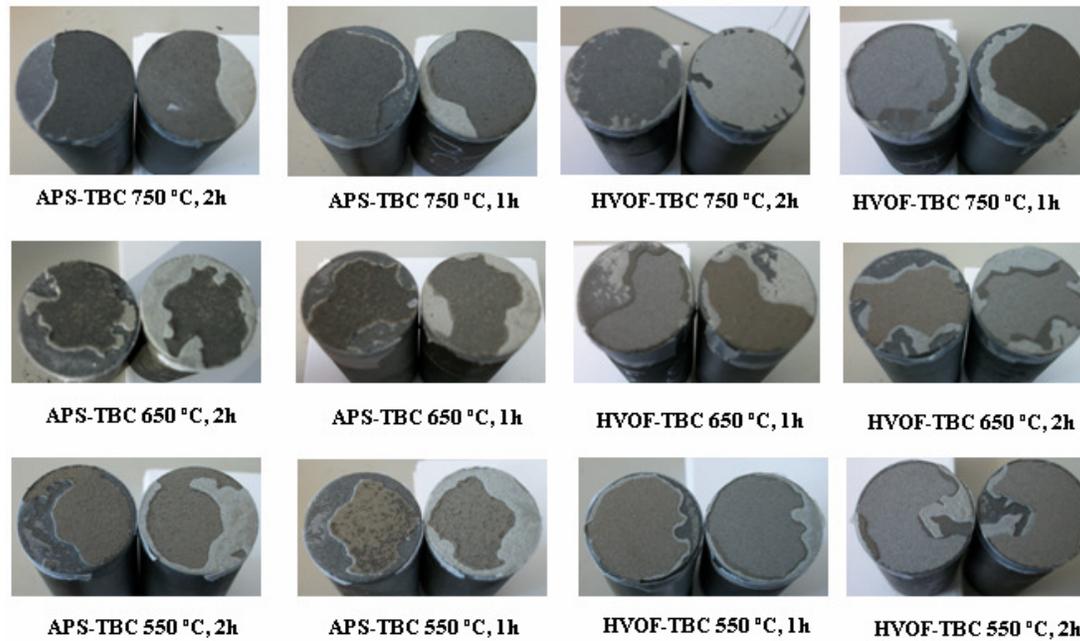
Fracture surfaces of a TBC systems after tensile tests
